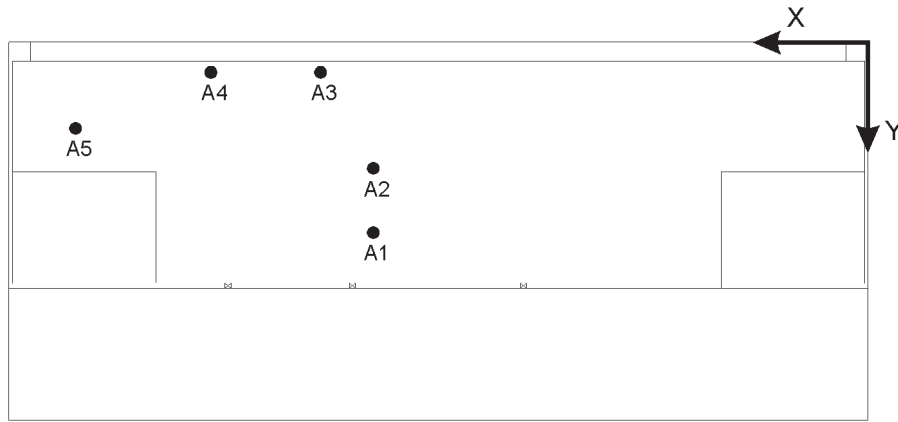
Assembly of Cable Tie Adhesive Mounts and Filter Mounts (Sheet 3 of 3)
